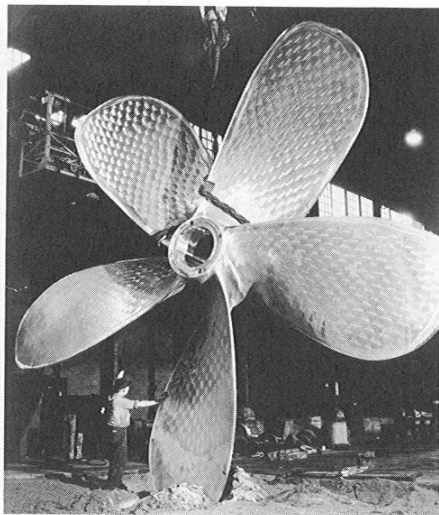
Propeller for a 114 000 ton tanker measures 7.5 m (24.7 ft) in diameter and weighs 37.52 Mg (82 725 lb). Part was machined and polished from a single 53.75 Mg (118 500 lb) nickel-aluminum bronze casting. Courtesy of Baldwin-Lima-Hamilton Corporation
